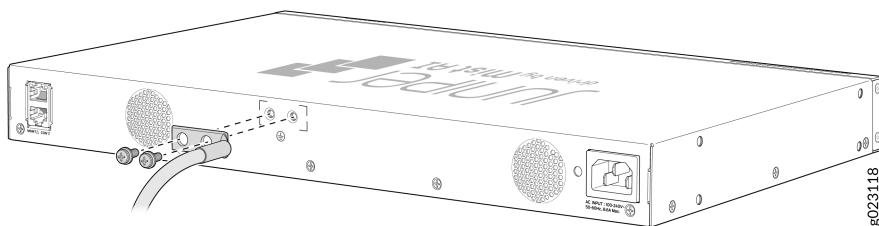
Connect a Grounding Cable to an EX4000-48P Switch
